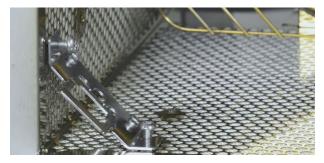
Attaching Fixing Screws to the Oven Wall and Floor
